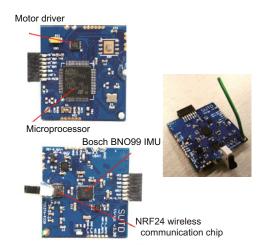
Customized next-generation PCB design with ARM CPU, IMU, and motor driver
